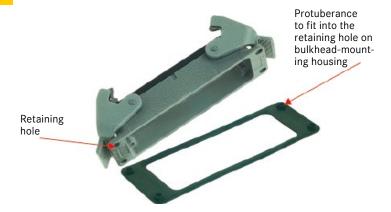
Bulkhead-mounting housing with rubber flange seal
